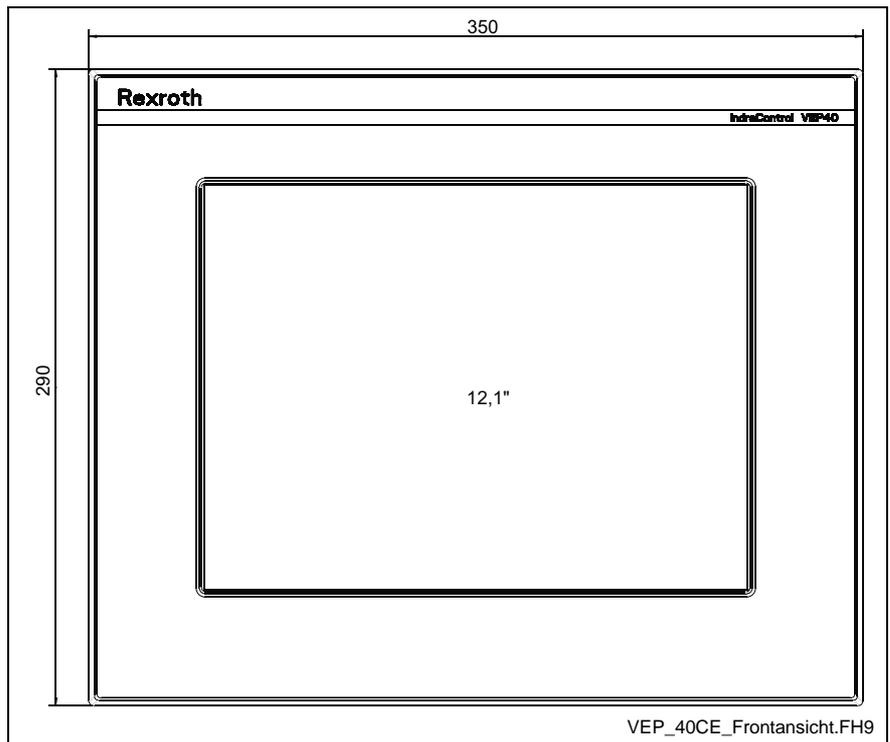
Dimensions - Front panel VEP 40.1CEU
